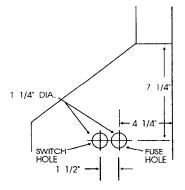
Spot centers and drill two holes for the switch/fuse assembly
